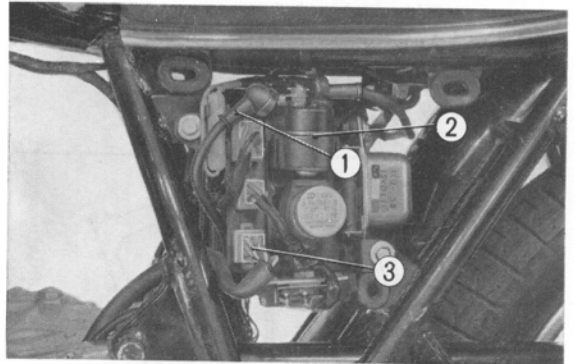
① Starting motor cable ② Magnetic switch ③ Wiring coupler
